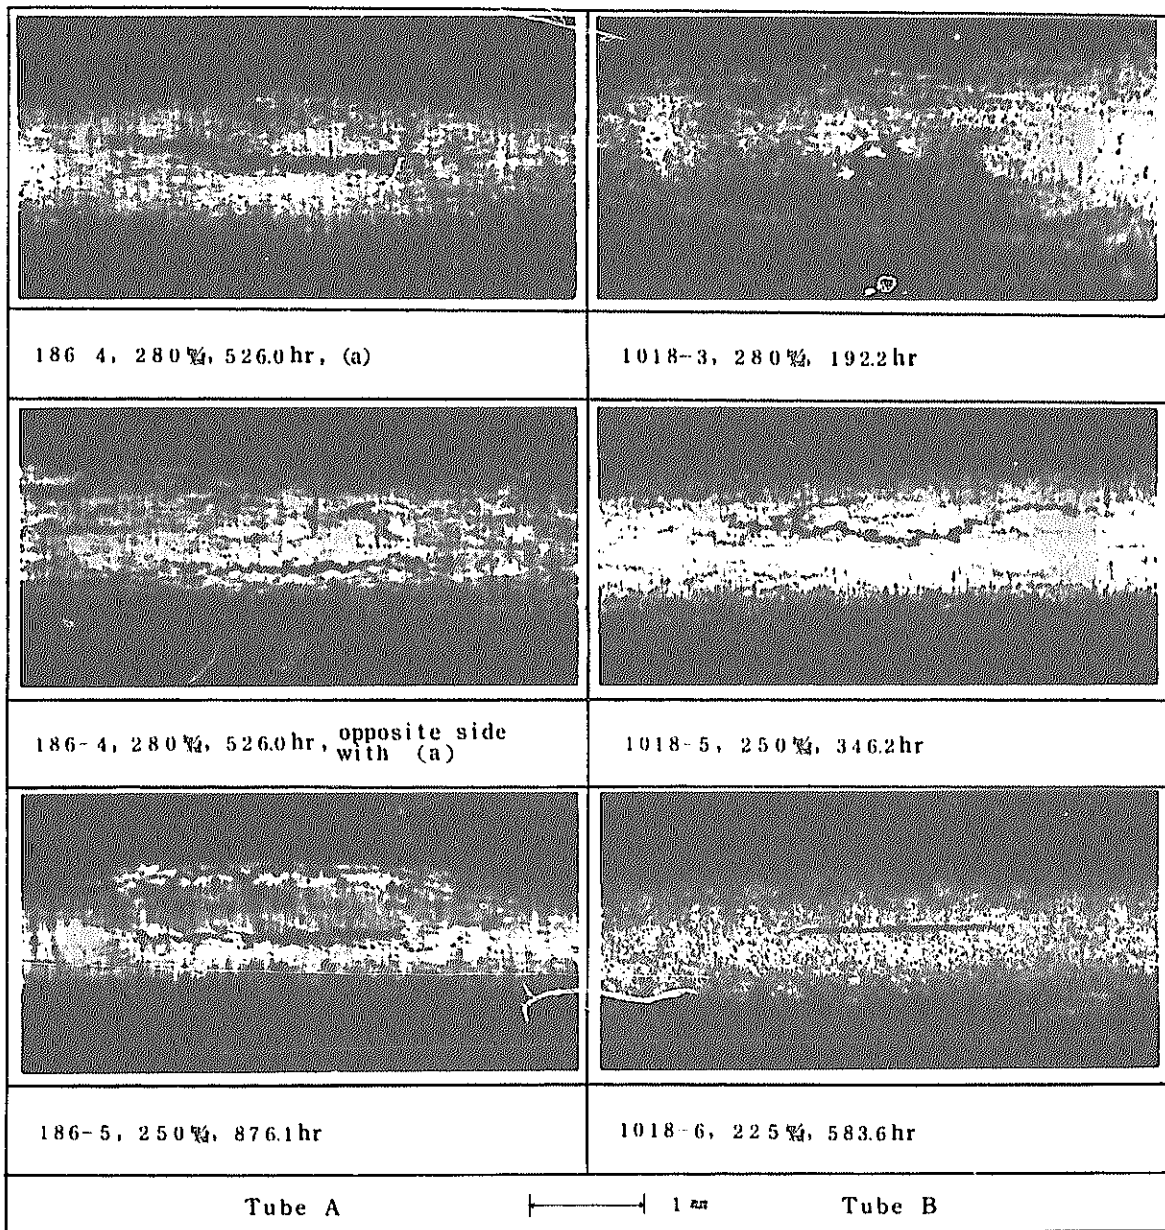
Some examples of superficial cracks of specimens ruptured under internal pressure at 650°C.
